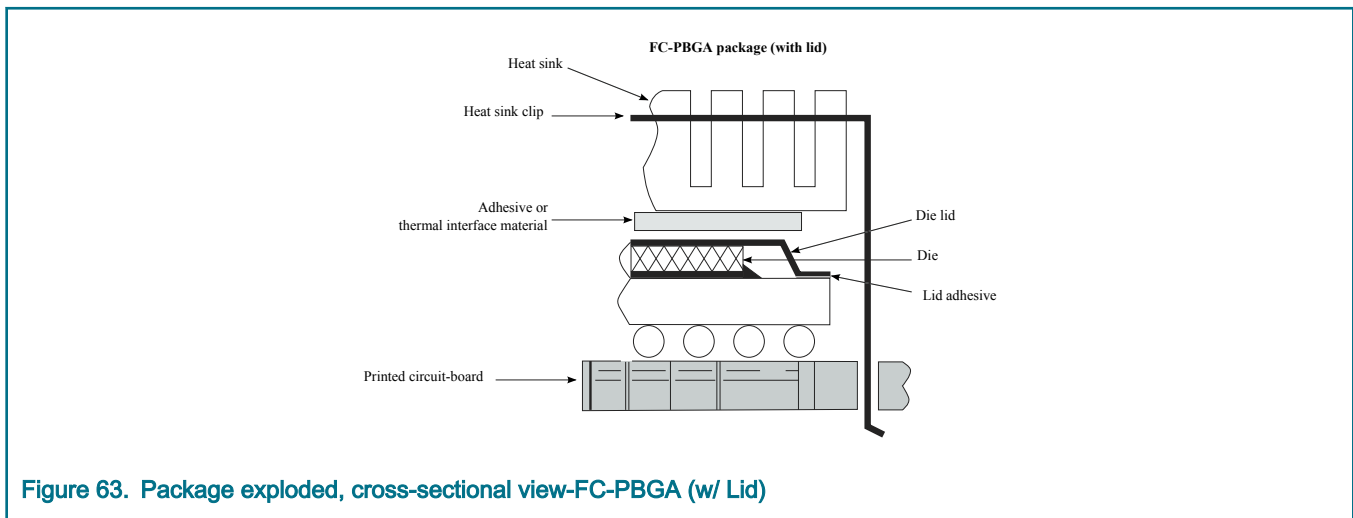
Package exploded, cross-sectional view-FC-PBGA (w/ Lid)
